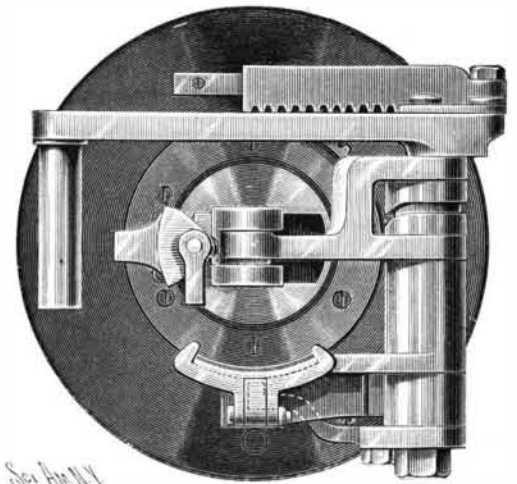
MODIFICATION—HANDLE AND WIPER COMBINED. CAN BE USED TO WORK EXTRACTOR.
